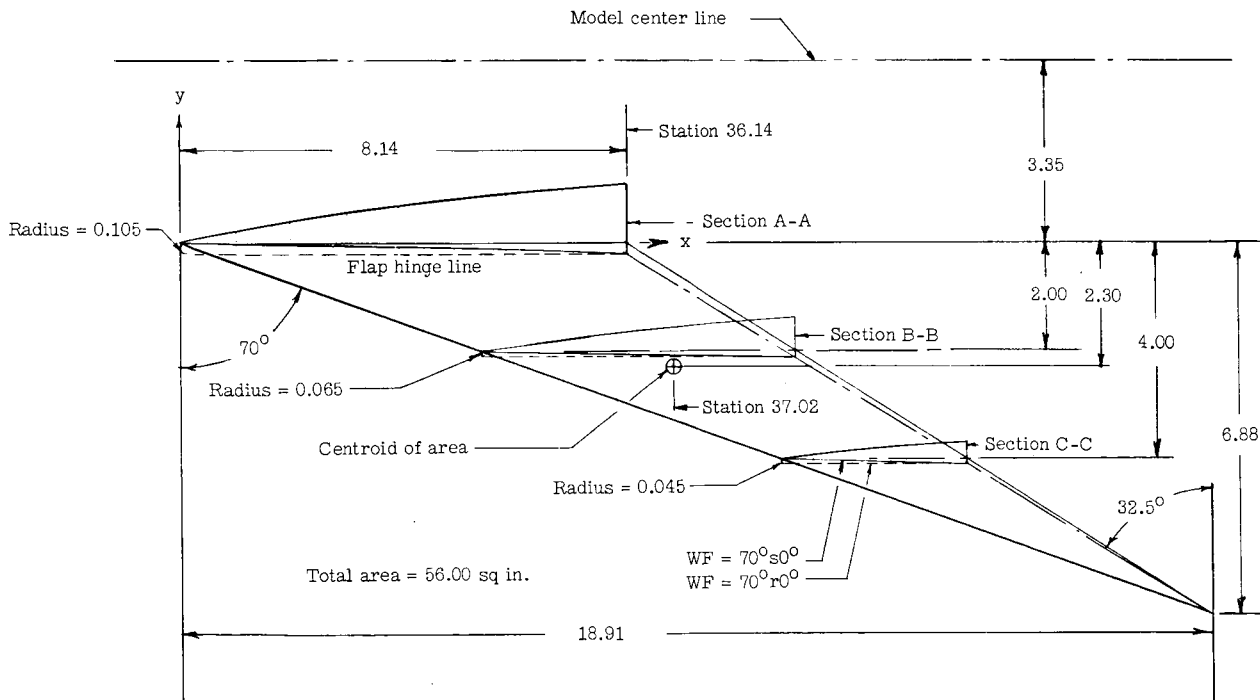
Drawing of model tested. All linear dimensions are in inches.
